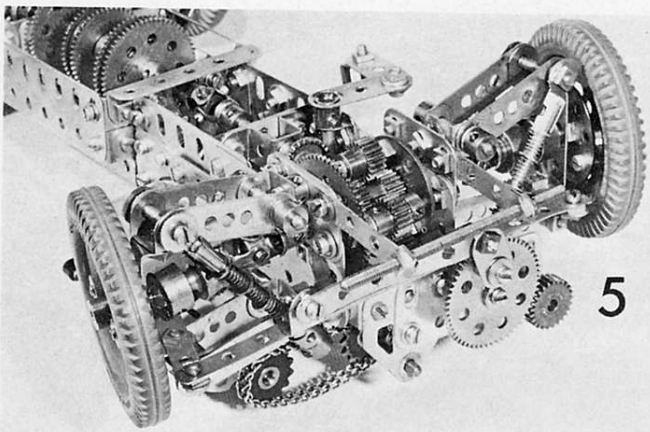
Front axle unit in close-up, showing spring loaded suspension struts and track rod drive arrangements for steering gear.
